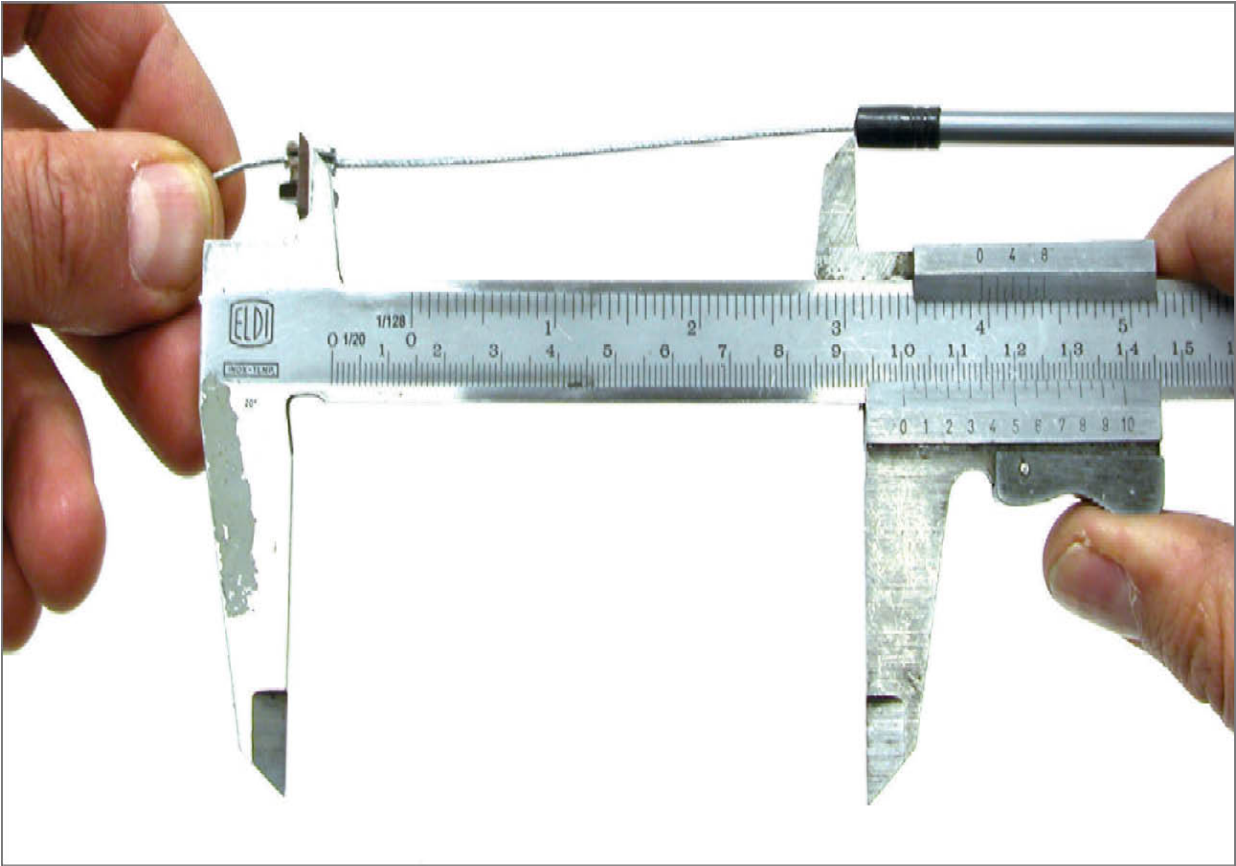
Measure approximately 100mm between end cap and center of pinch bolt
